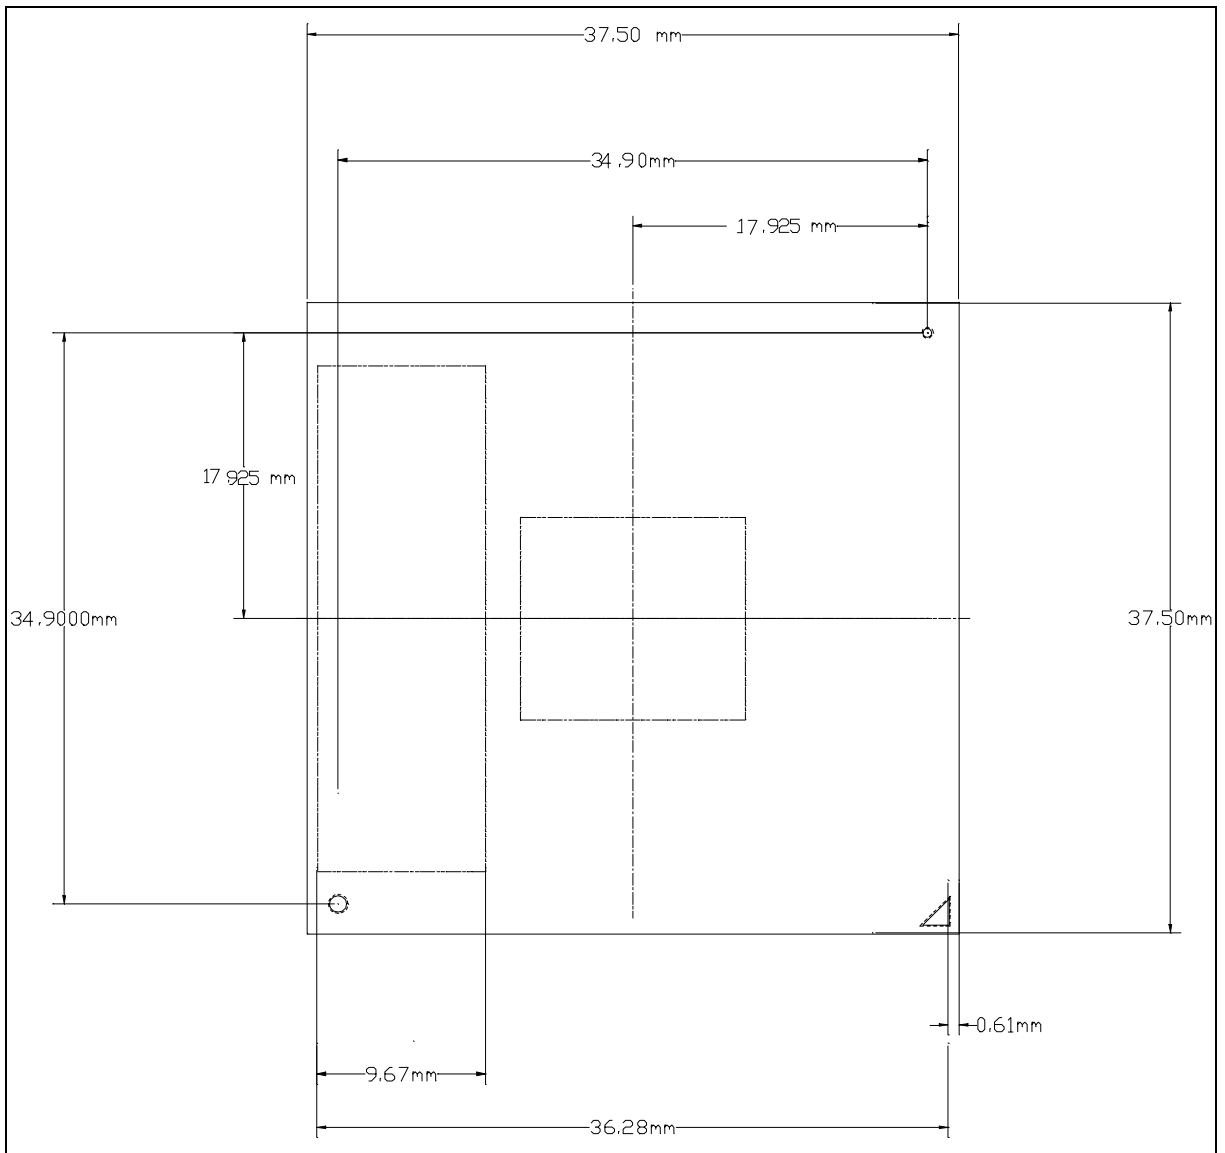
MCH Micro-FCBGA Package Dimensions (Side View)
